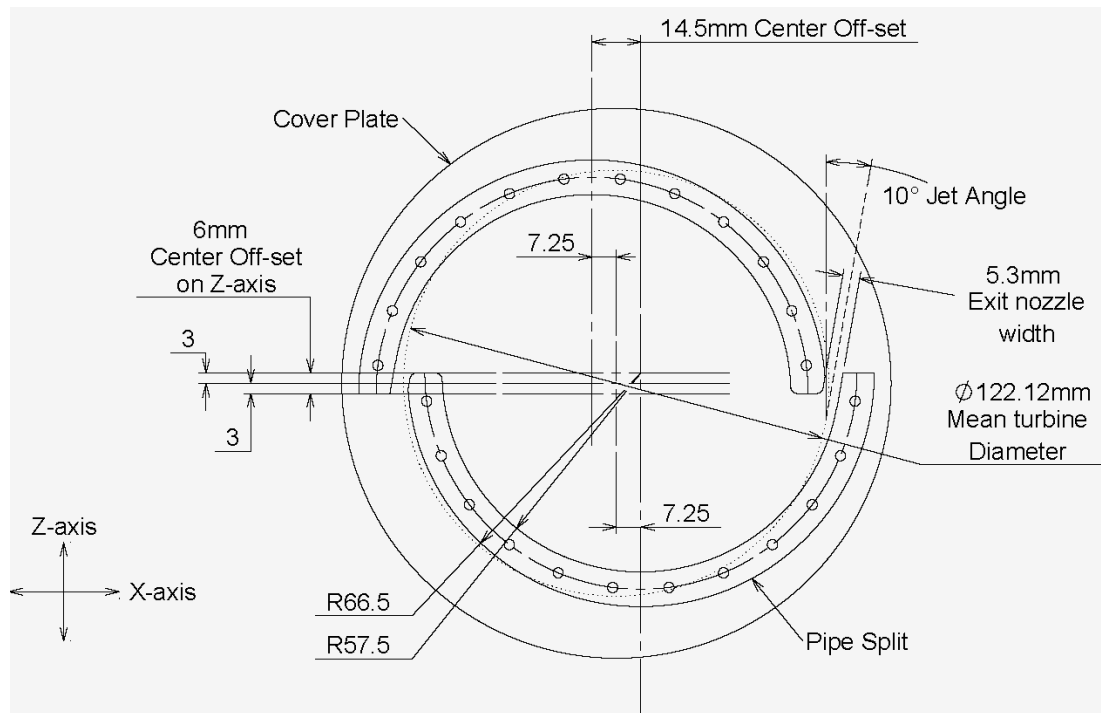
Machining of screw holes on splits (All dimensions in mm)
